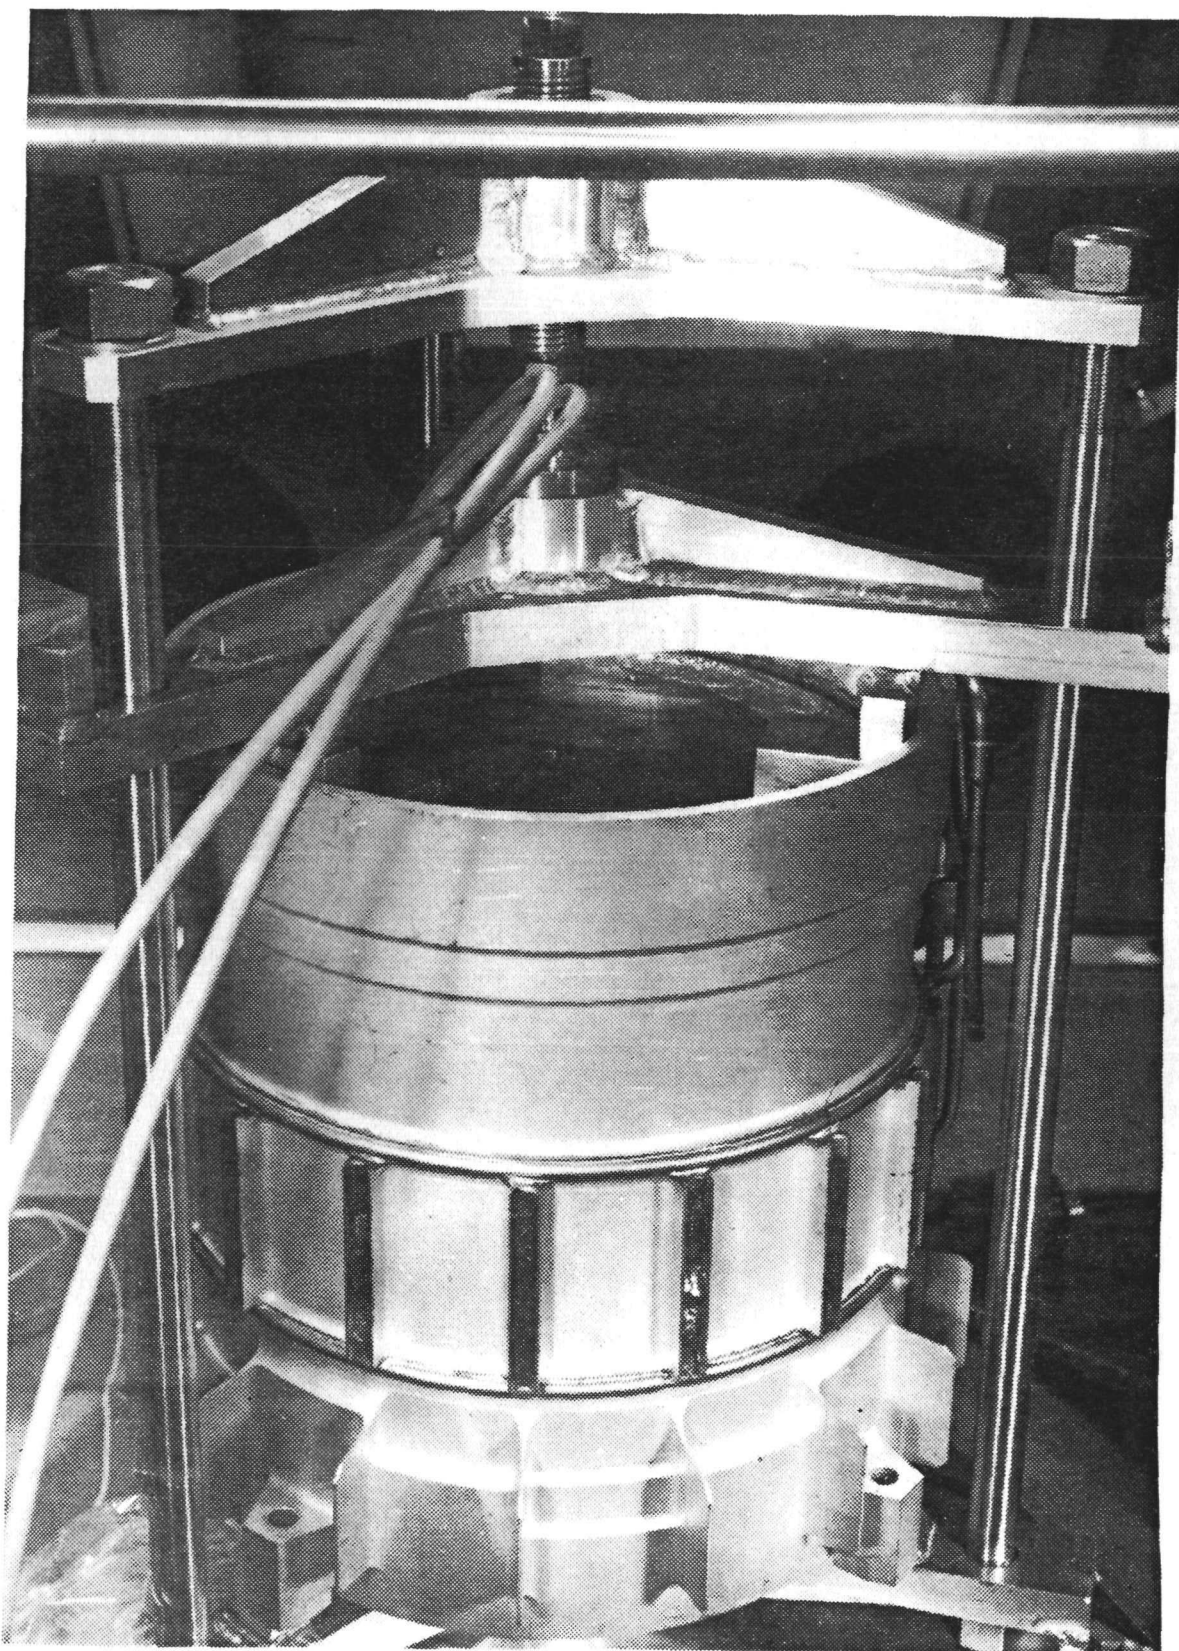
Weld Tooling and Associated Fixtures-IHF
